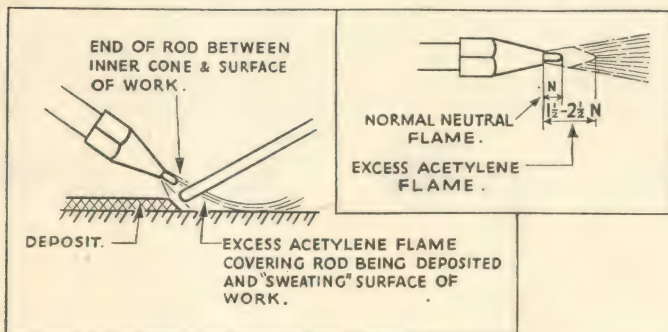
SHOWING (above) TYPE OF WELDING FLAME USED IN DEPOSITING METAL ON VALVES, ETC.
